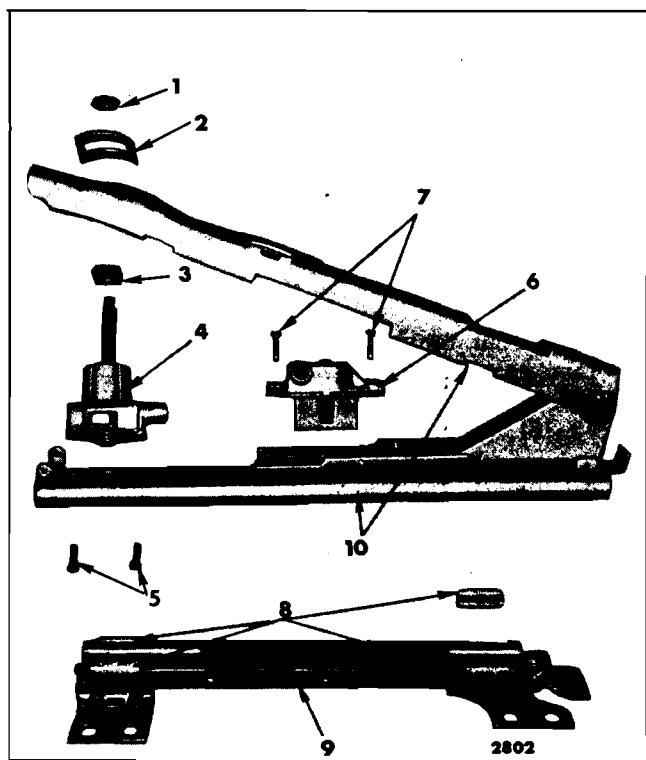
Four-Way Seat Adjuster Components - Buick "B, C & E" Styles
